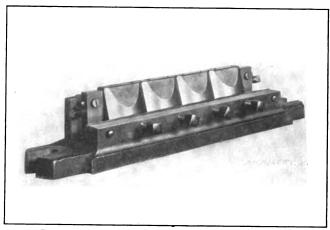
Fixture for Holding Jaws while Milling the Bevel
